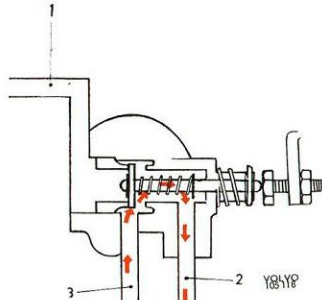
Principle, hot start valve with throttle control in idling position
